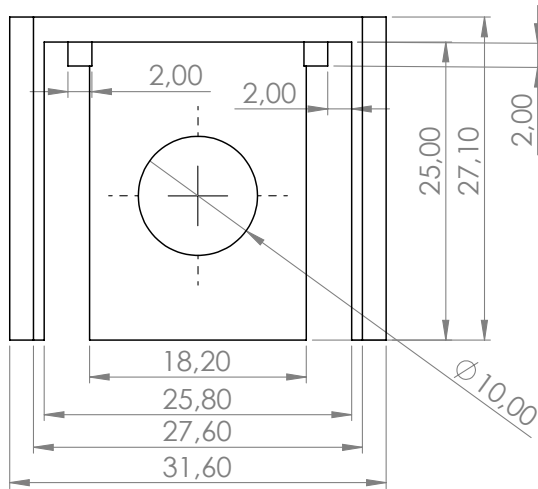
Magnetometer holder main body, top view. Indent of 2 mm not visible.
